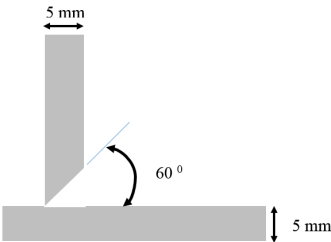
A 60 ° fillet joint configuration for full penetration weld setup used in the experiments.
